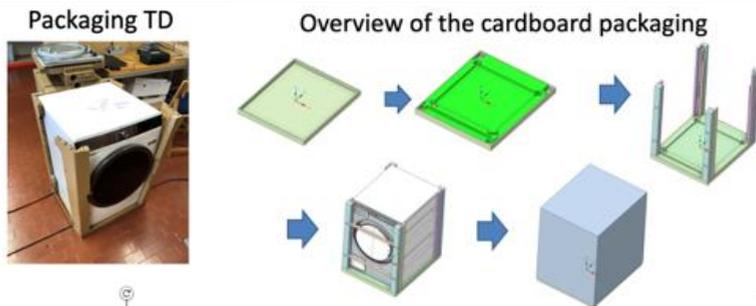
Design of tumble dryer cardboard and honeycomb packaging.
